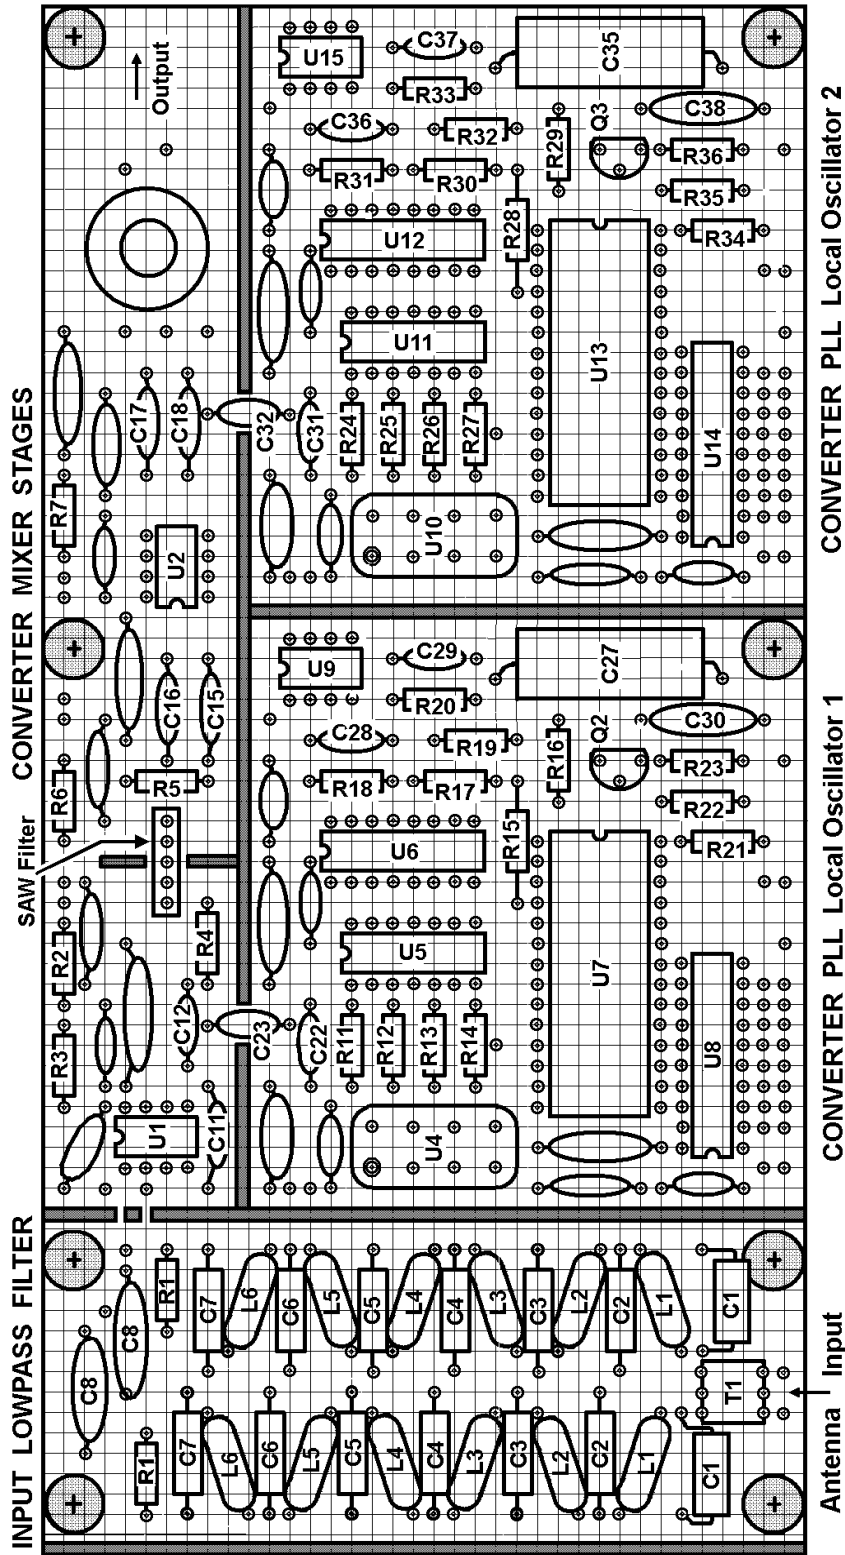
Multi-Band Converter PCB layout on a tenth-inch grid. On two-sided-foil stock, it has added shield strips soldered on in dark grey areas. Circles with light grey indicate mountings to chassis bottom plate; see Figure 50-11 for mounting details. Large double circle at top-right is L1 of the 7-Resonator Output bandpass filter. Antenna Input Bandpass filter is symmetric, following Figure 42-2 circuit diagram. Connections to U1 input from C8A, C8B are by wires going through holes in the shield plate. LO injection via C23 and C31 is through slots in horizontal shield plate. Unmarked ovals are for disk bypass capacitors for 5 and 12 VDC supply lines. Printed on 8 1/2 by 11 paper, image is very close to exact size of 7.90 by 3.80 inches. PLL 2 is a copy of PLL 1, reference designations for capacitors of PLL 2 is +8 from PLL 1, with resistors +13 on PLL 2 versus PLL 1.
